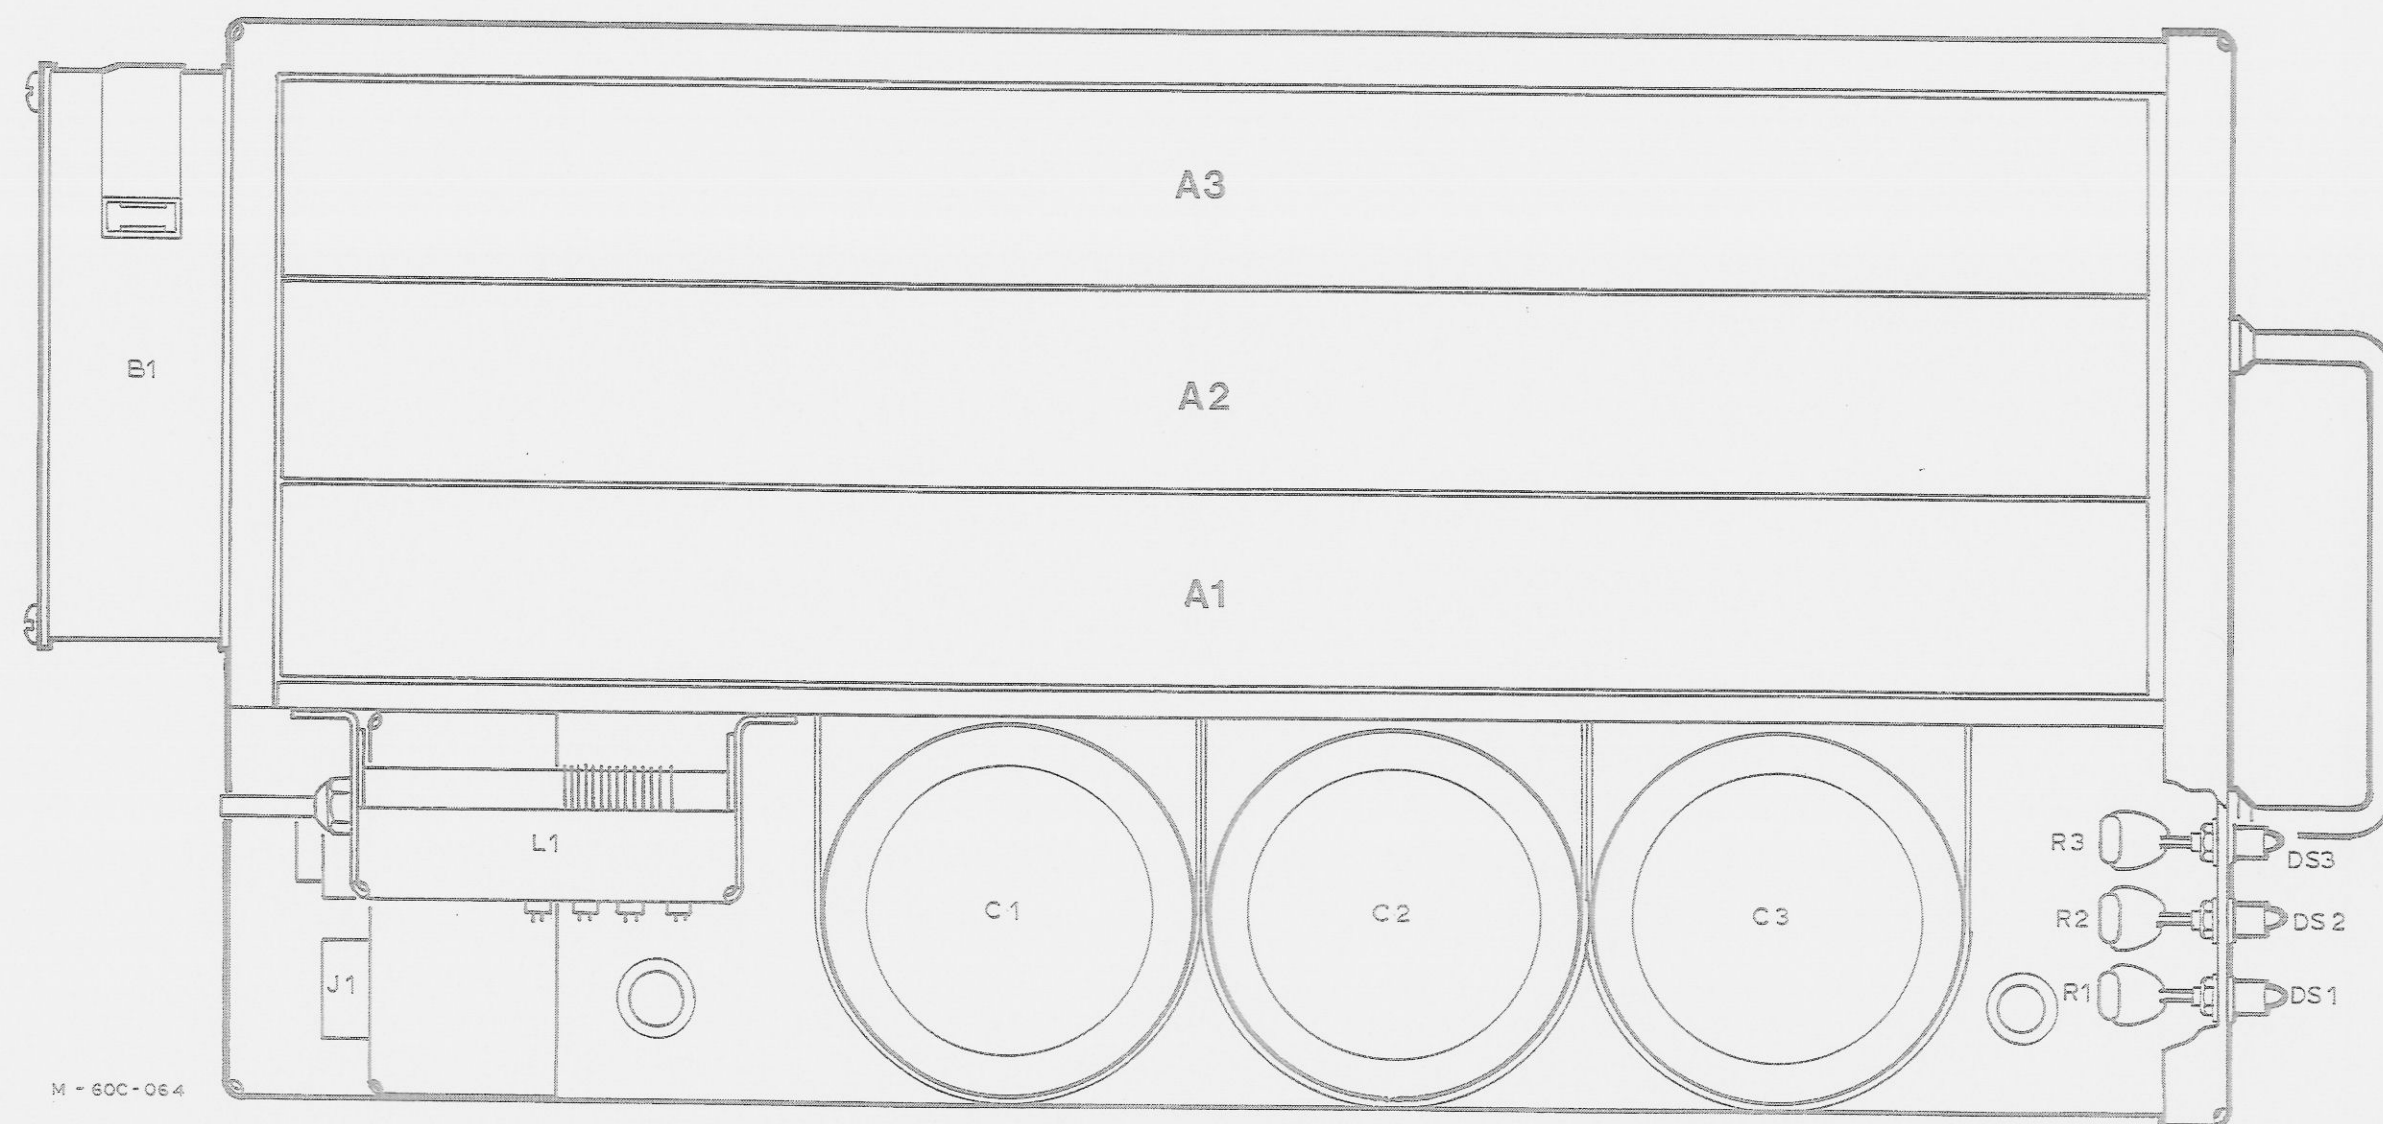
Assembly Detail - NAP10/1 1.25 kW AM Power Subsystem Module (Top View)
